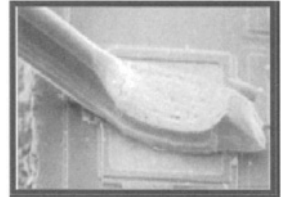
(c) Bond formation with wedge tool with polished front and back radii [Courtesy: Gaiser Tool]
